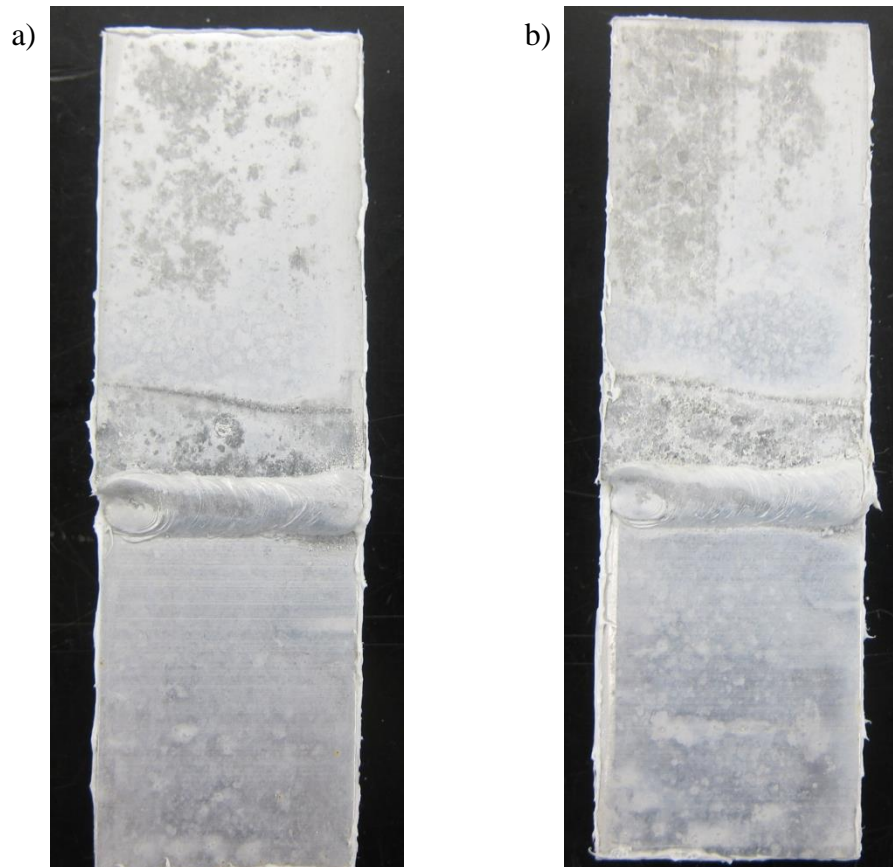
Duplicate samples of lap-joint welded configuration C1 (ER5356/AA7108/L) in the as-welded T6 condition.
